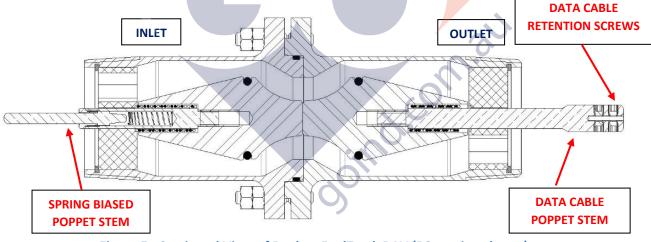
Sectioned View of Banlaw FuelTrack BAV (R2 version shown)
